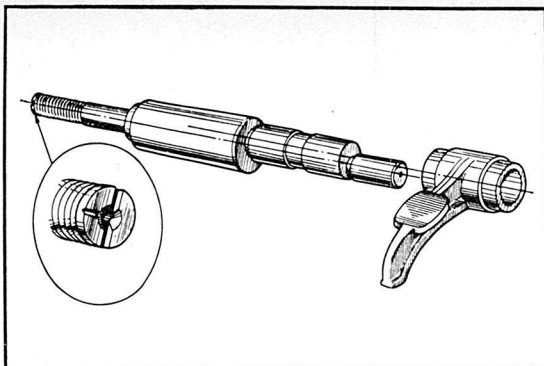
Valve clearance is set on the Honda 450 by rotating this shaft. The eccentric moves the pivoted end of the follower up or down as needed to set valve lash.
